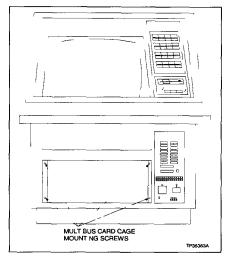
7 Multibus Card Cage Removal for IIOIS40/IIOIC402 Consoles
